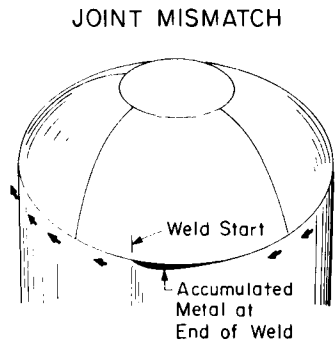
Production girth weld with metal expansion causing mismatch at finish of dome to barrel weld.
